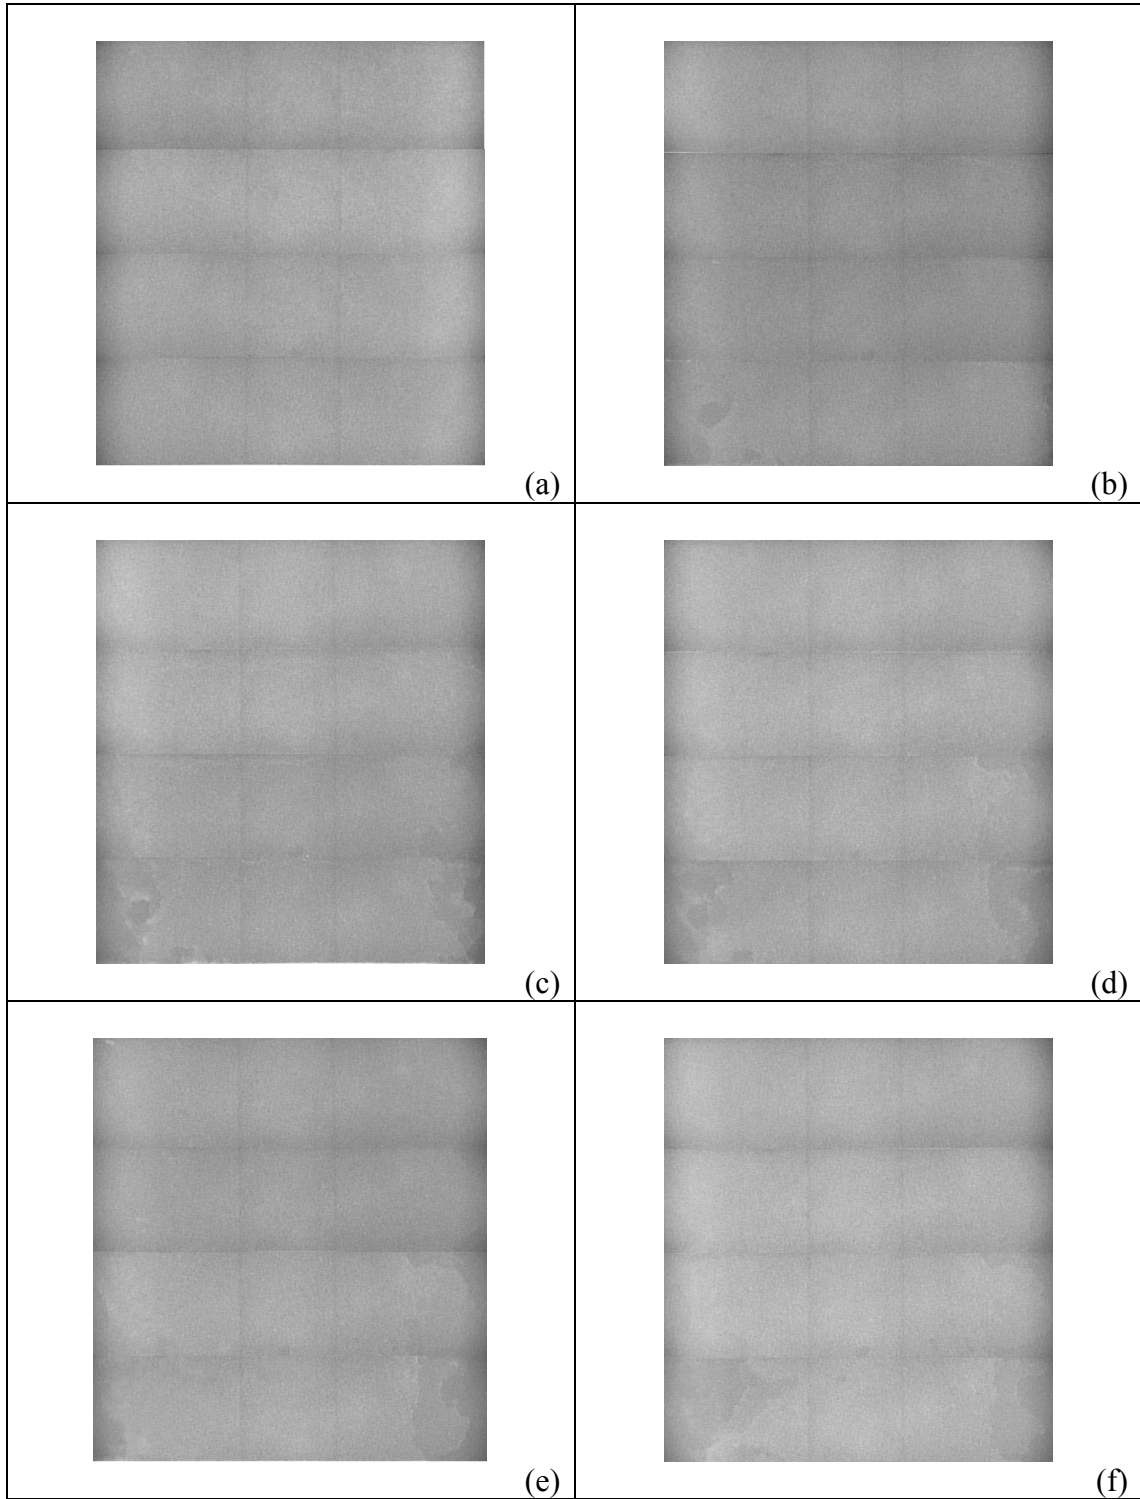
X-ray investigation on the castings produced using the 10 ppi ceramic foam filter, executed using a Bosello SRE80 industrial equipment.
